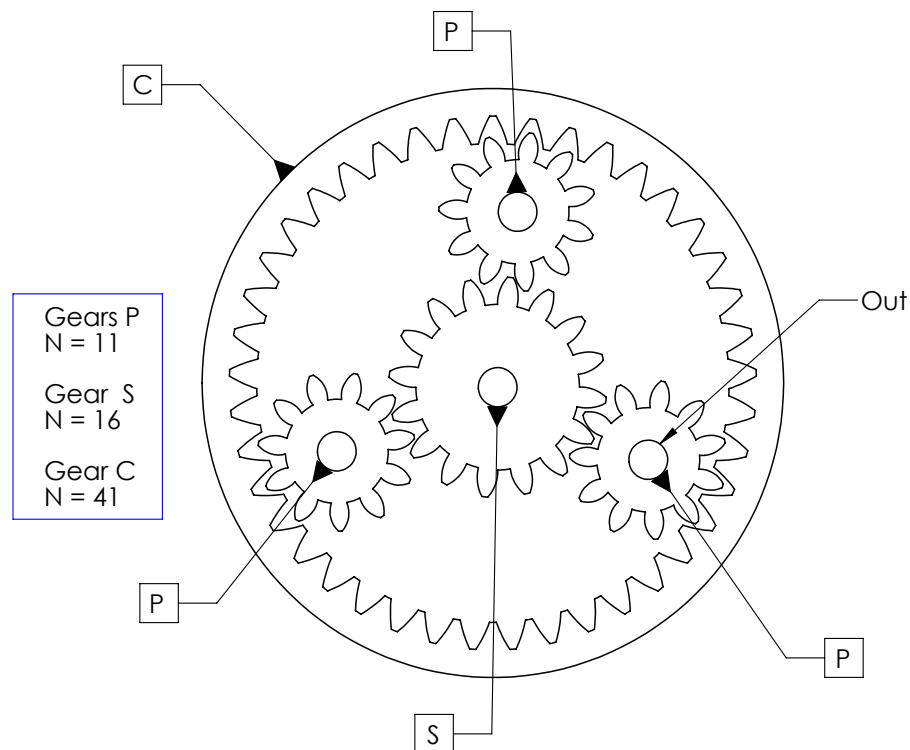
Gearing between the DC motor and the encoder with it's respective values, where the motor is connected on the sun gear G_s , and the encoder is attached to the three planetary gears G_p and being the crown of the system G_c part of the case, therefore, always in repose.
